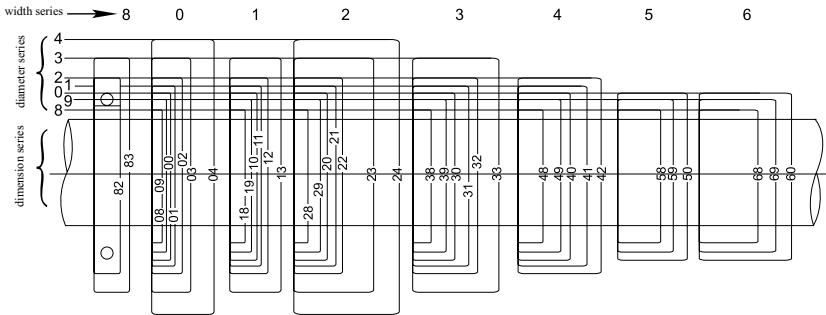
Illustration of radial bearing dimension series (taper roller bearings excluded)
